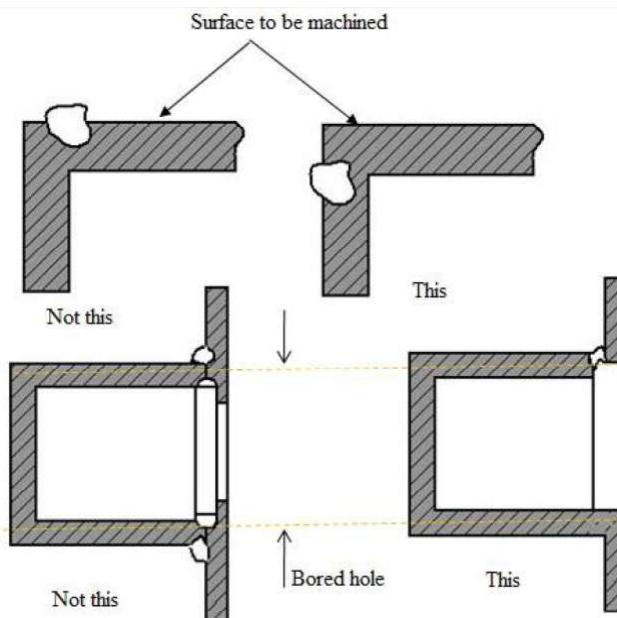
Weld metal outside the portion of the weldment to be machined
